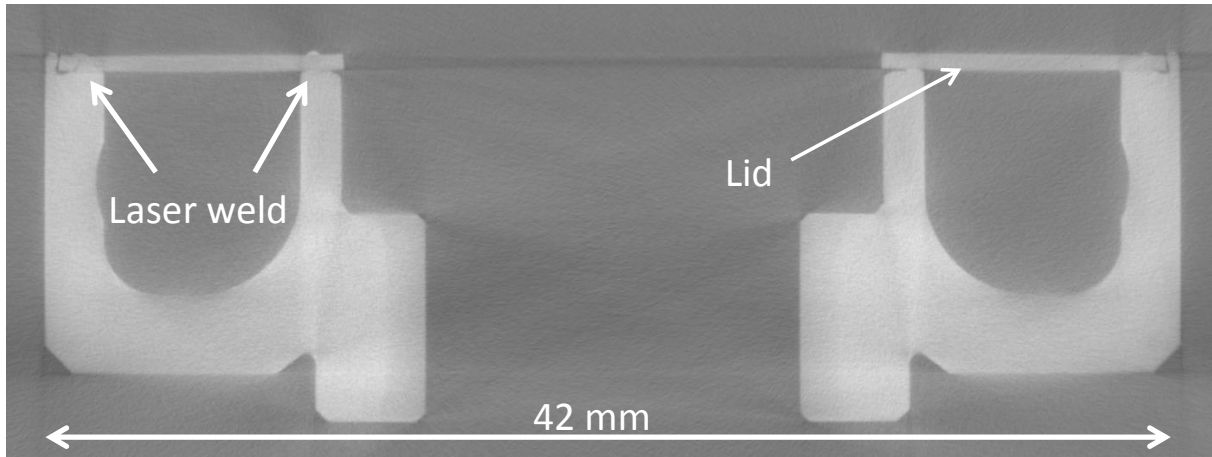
A virtual 2-D slice of two laser welds of steel (stainless steel lid welded on a carbon steel cup).
